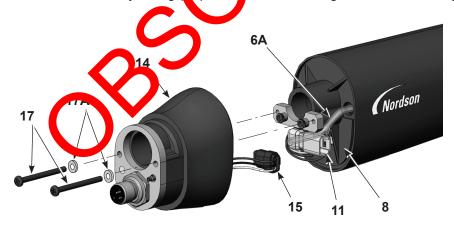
Tube-Mount Spray Gun Disassembly 3 of 5
